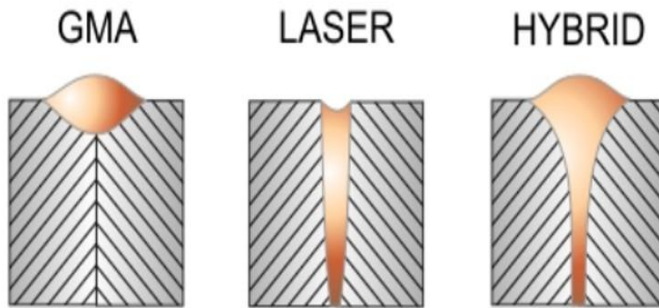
Penetrant of laser-arc hybrid welding
